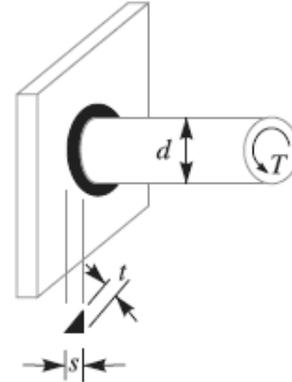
Circular fillet weld subjected to torsion.
